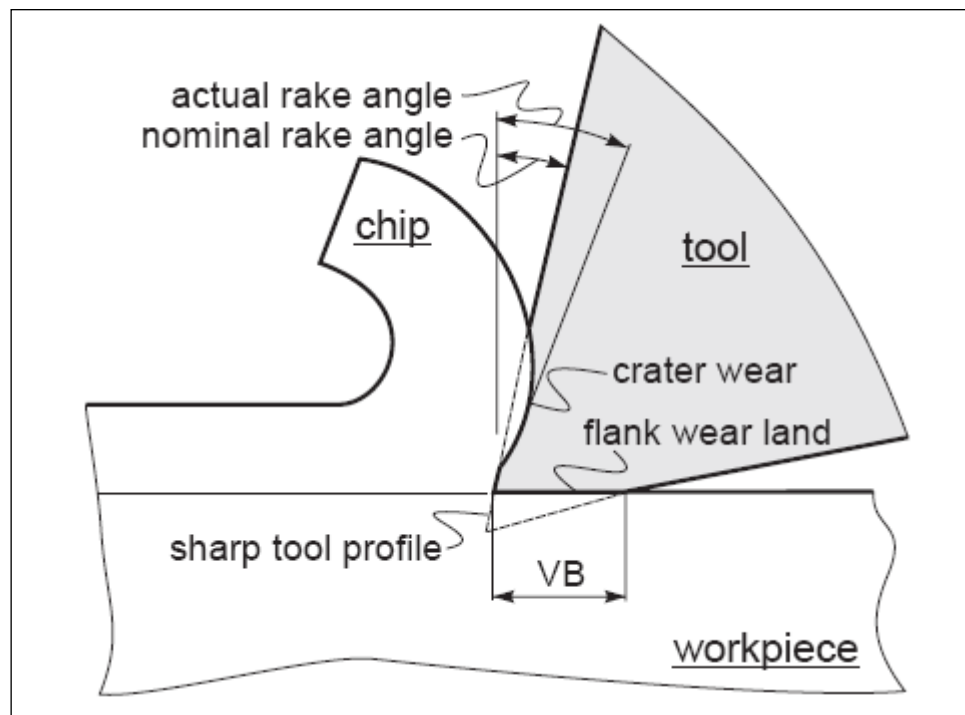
Cross-section perpendicular to the major cutting edge of a worn cutting tool showing the effect of crater wear on the tool rake angle and flank wear land.
